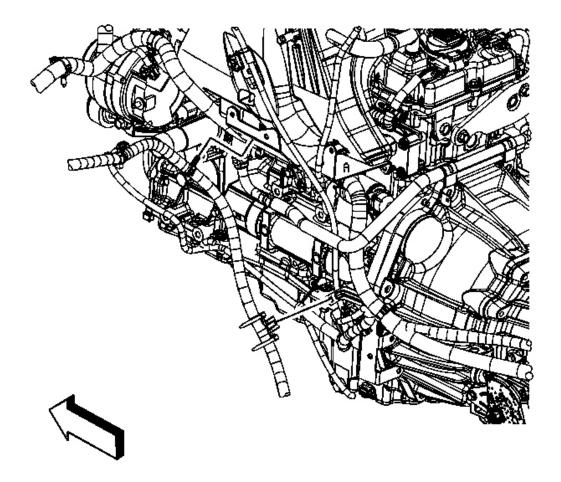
View Of Wiring Harness Retainers Courtesy of GENERAL MOTORS CORP.
